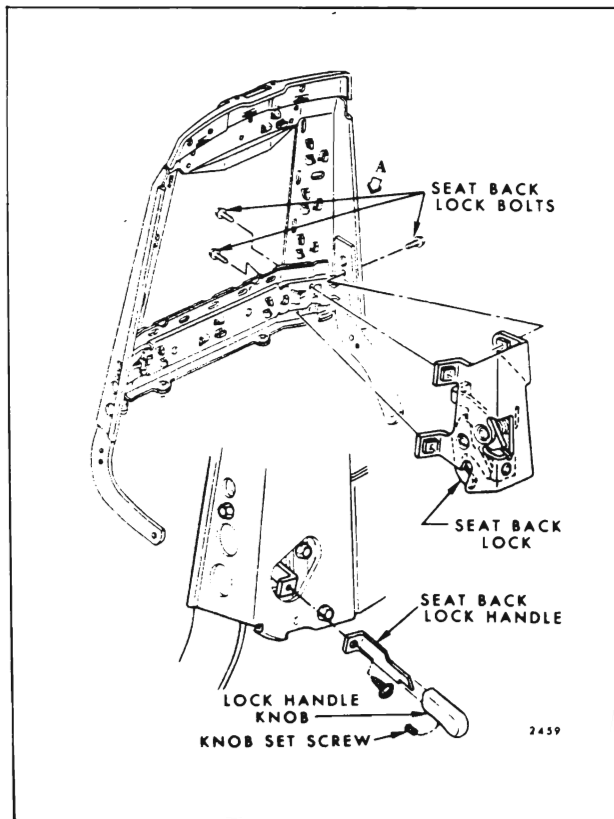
Seat Back Lock - "F & Z" Bucket Seat
